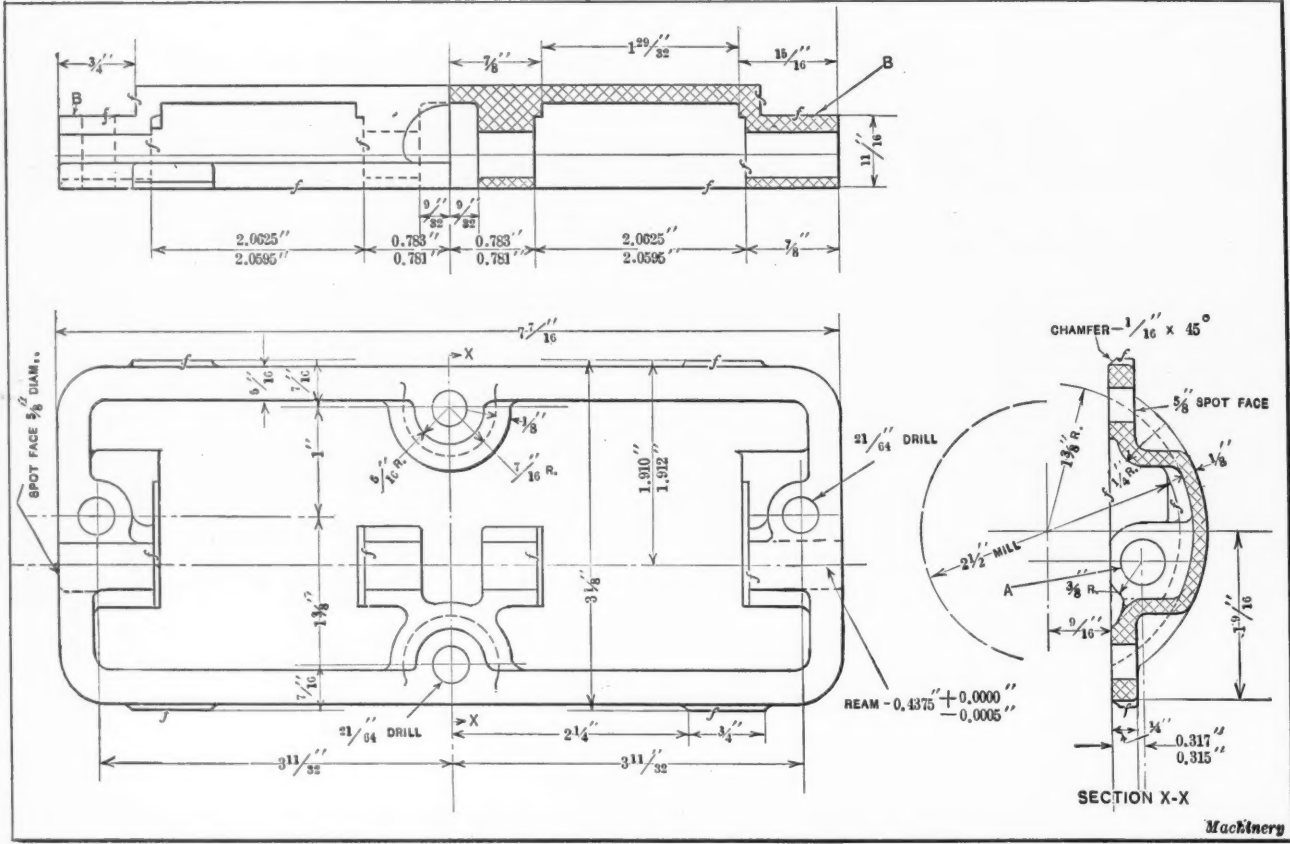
Detailed Views of the Valve Follower Housing Cover
